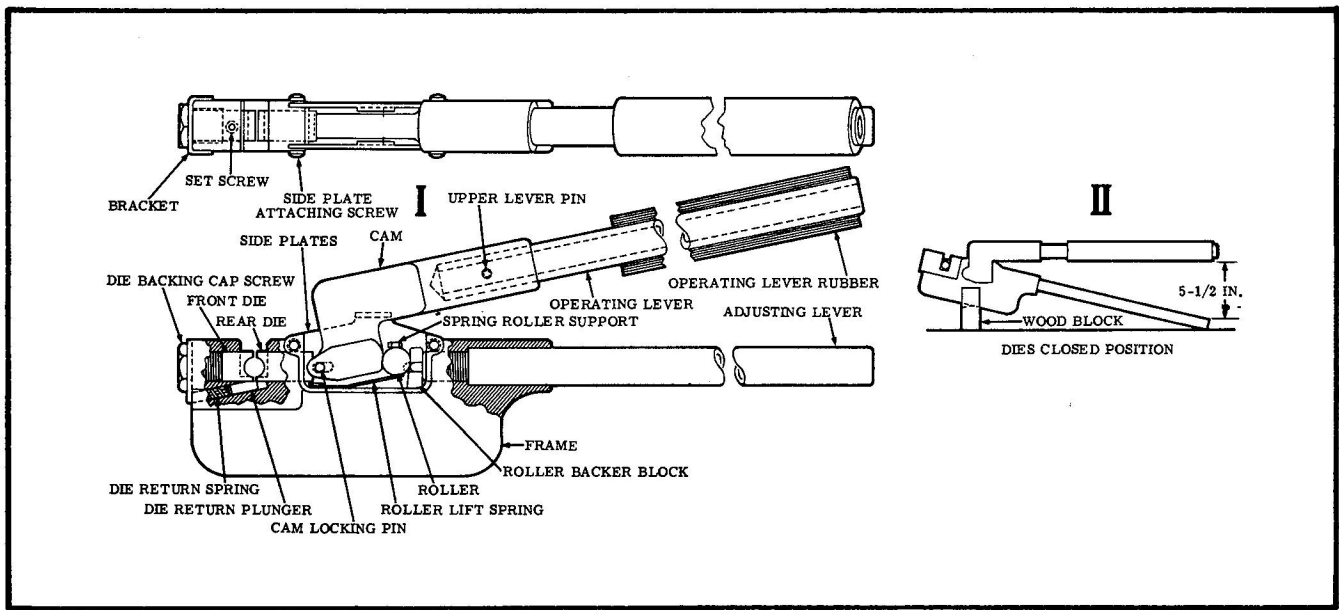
Tru-Loc Cable Terminal Swaging Machine
